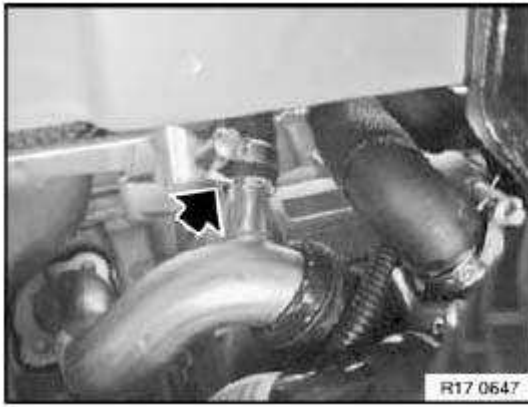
Locating Coolant Hose Between Coolant Pump, Coolant Radiator And Oil-Water Heat Exchanger
